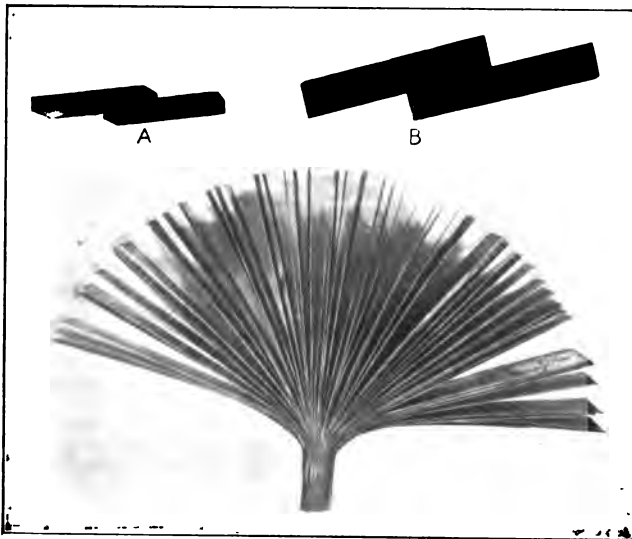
Examples showing Possibilities of Welding Thick Materials
